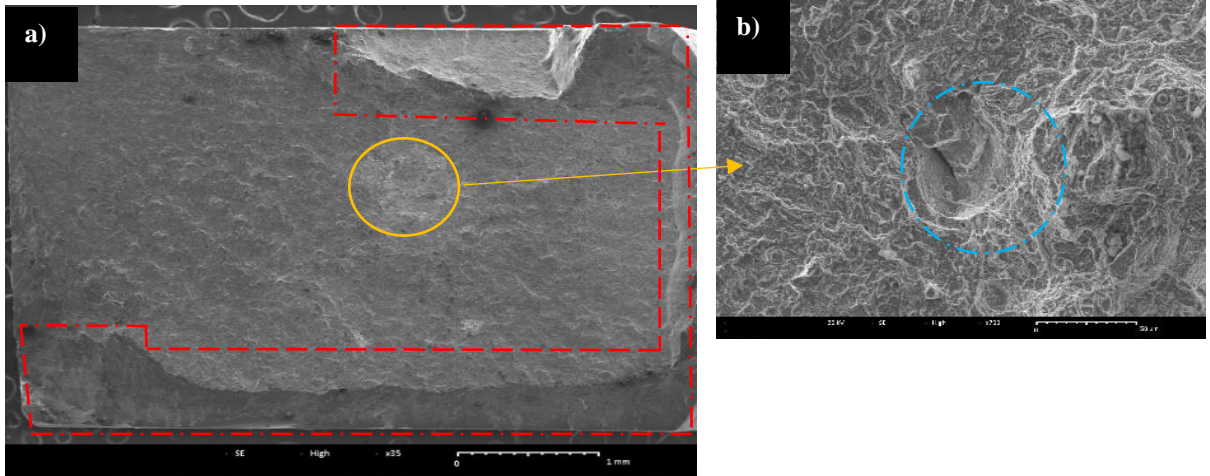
SEM images of the fracture surface of the first specimen printed in cycle 1 ($S_a= 312$ MPa , $N= 415074$); a) overview of the fracture surface at $\times 35$, b) lack of fusion defect (LOF) at $\times 700$
